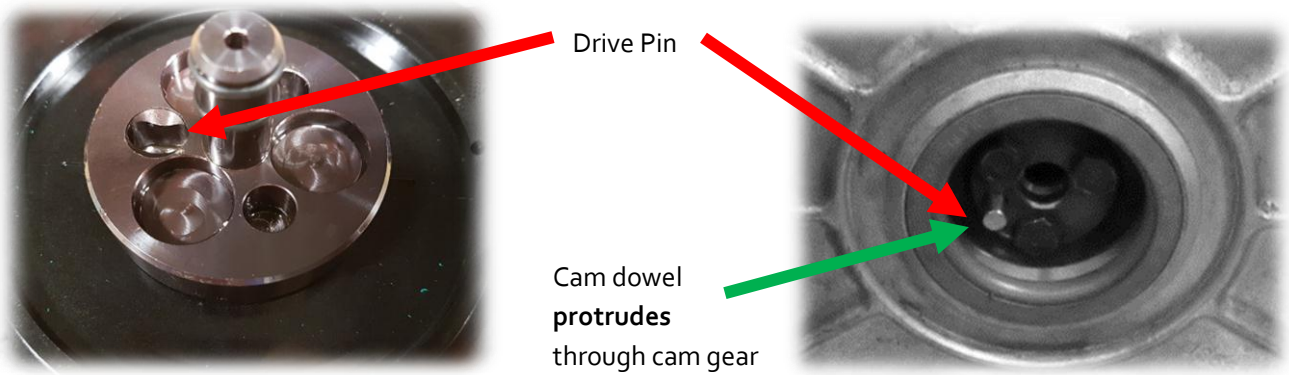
Pin drive spindle. Has locating hole for cam dowel pin.
